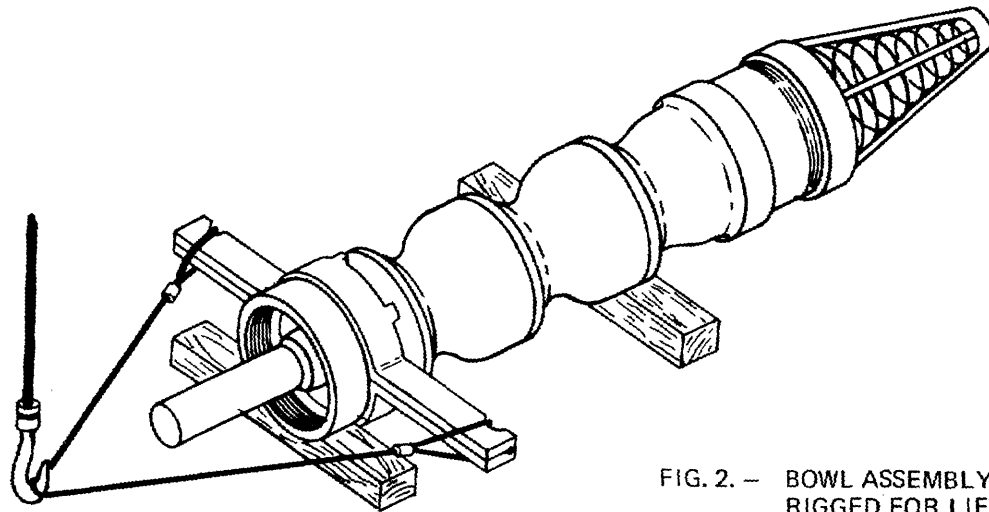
BOWL ASSEMBLY RIGGED FOR LIFTING.
